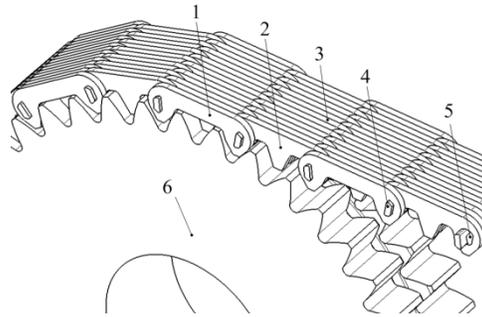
Transmission sketch of double-pitch rock-pin silent conveyor chain, 1-Reinforcing plate, 2: M-plate, 3: Guide plate, 4: Locating pin, 5: Rolling pin, 6: Involute profile sprocket
